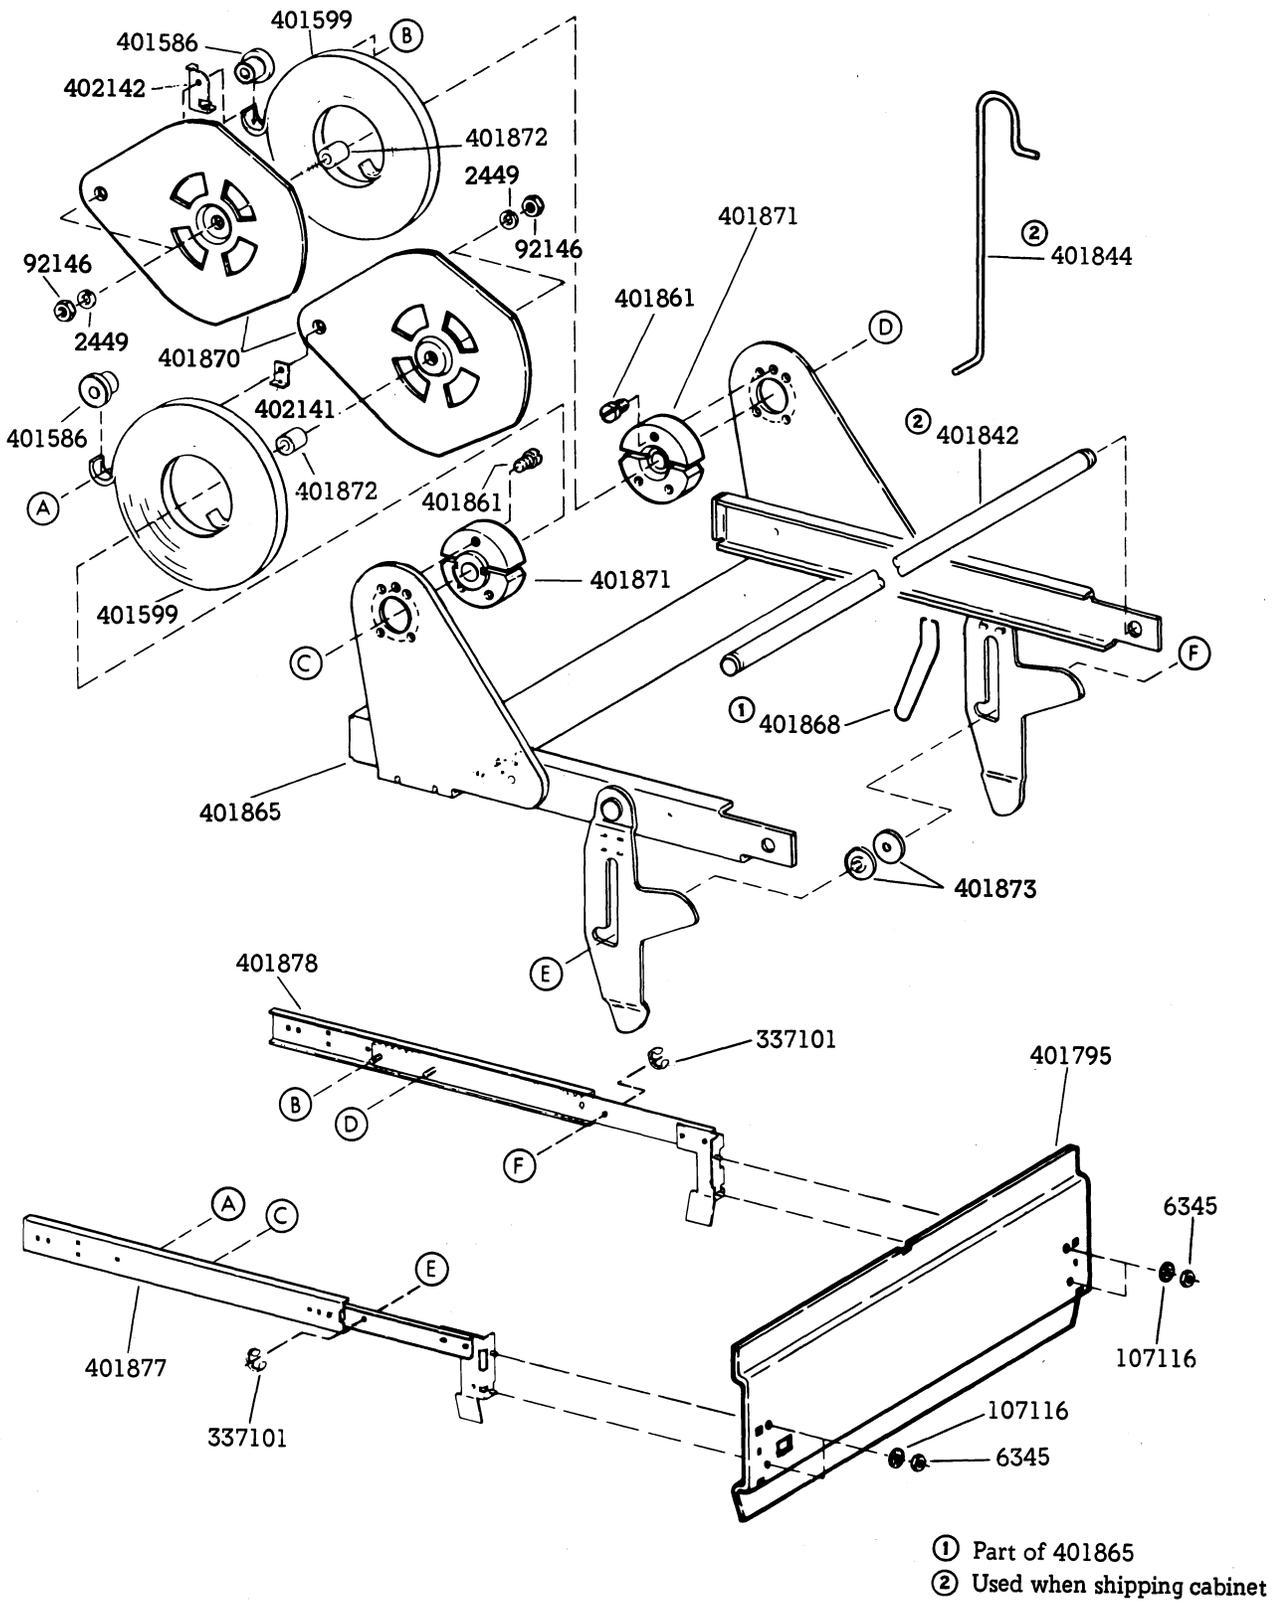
40CAB251/AA Printer Under Monitor Cabinet Mounting Cradle
